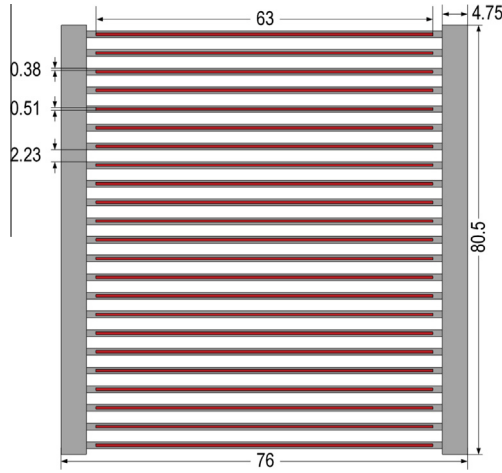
Cross section view of standard fuel element (dimensions in mm).
